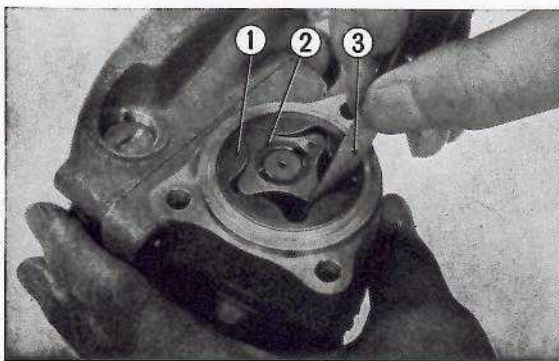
① Outer rotor ③ Thickness gauge
